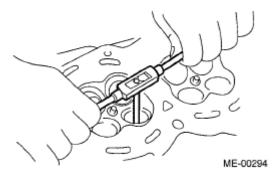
Reaming Inside Of Valve Guide Using ST Courtesy of SUBARU OF AMERICA, INC.
